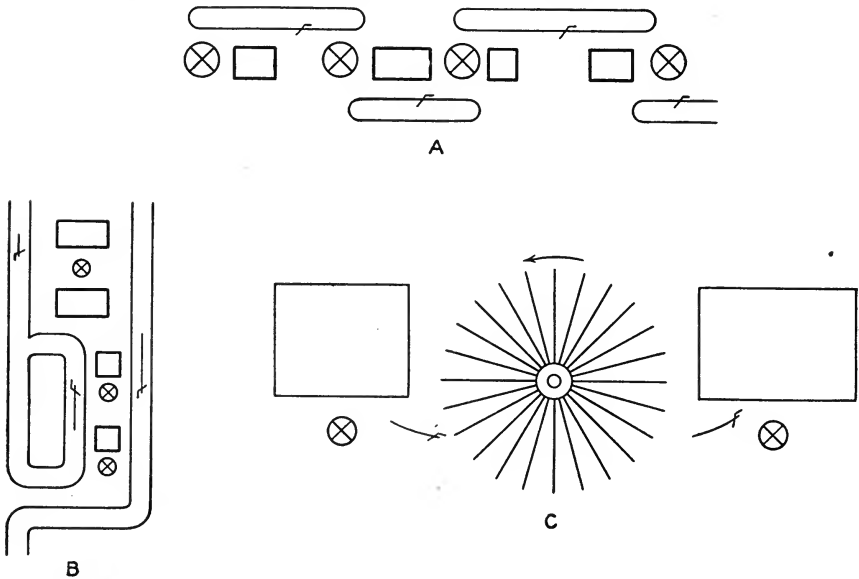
Recirculating conveyors for holding material between operations. B shows how a loop can be employed to accumulate parts ahead of machines operated intermittently. C represents a pronged type of conveyor used to allow drying time for rubber cement, the stock being draped over each prong.
